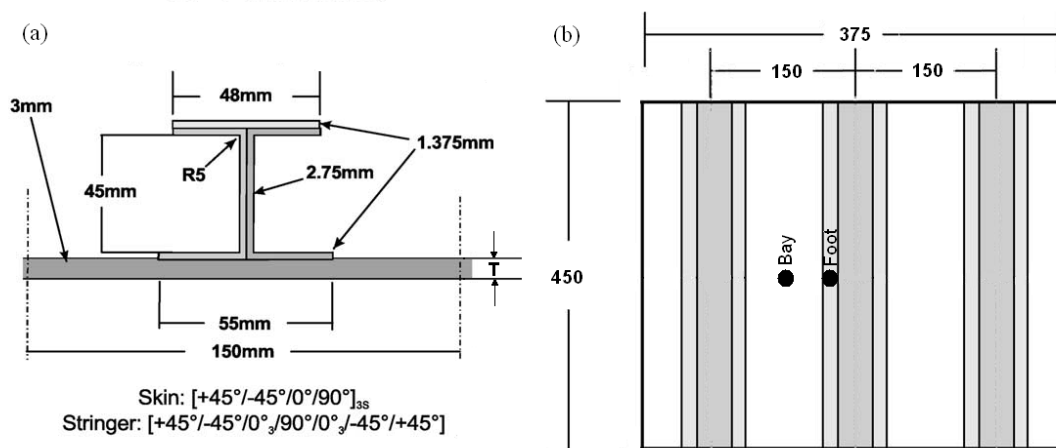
Stiffened panel example from [8]. (a) Stiffener configuration.(b) Plan view of panel showing impact sites.
